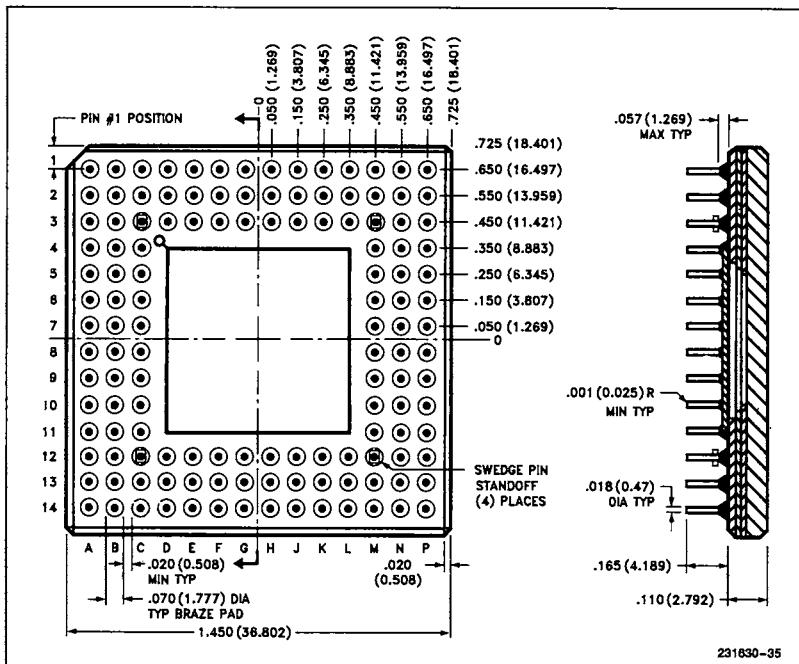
132-Pin Ceramic PGA Package Dimensions
